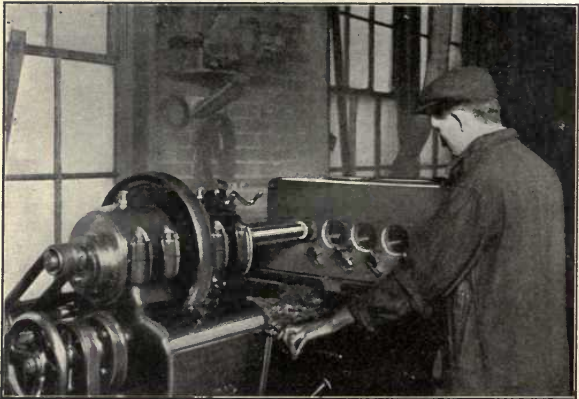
Grinding a four-cylinder unit for an automobile engine on a Heald cylinder grinding machine.
